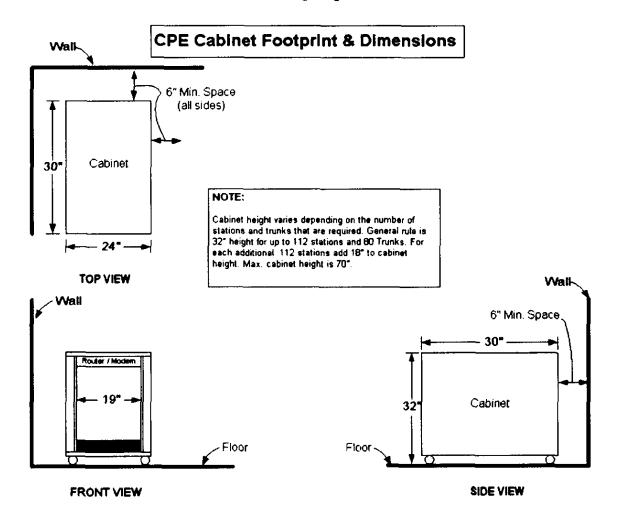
Standard Call Processor Unit and Cabinet Dimensions
